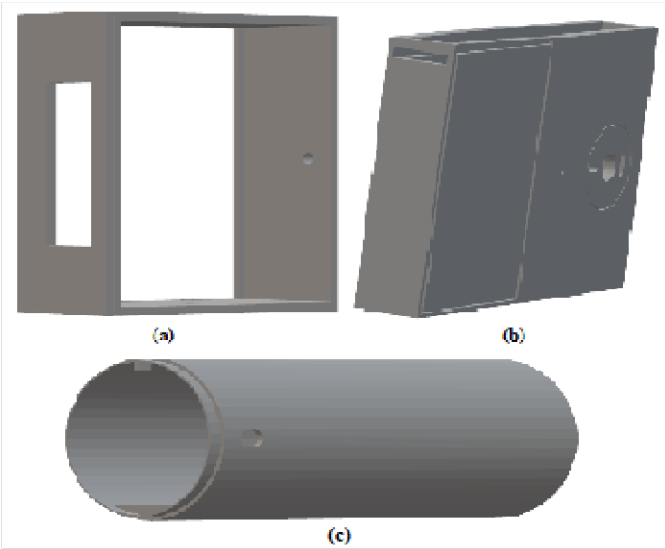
Housing box 3D models. (a) Electronics box, (b) Gear box, (c) Motor cover
